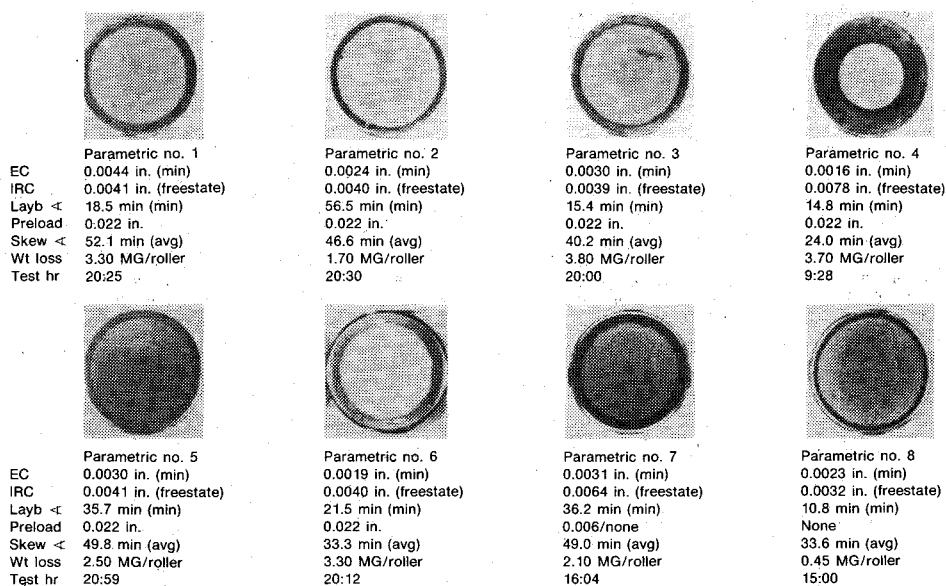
Bearing roller end wear pattern (all wear concentric).
